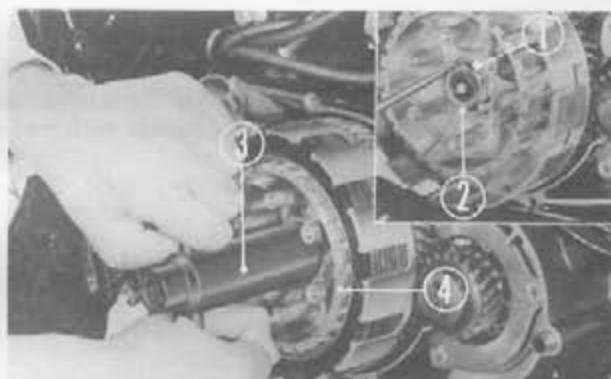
① 18mm lock washer ③ Lock nut wrench
